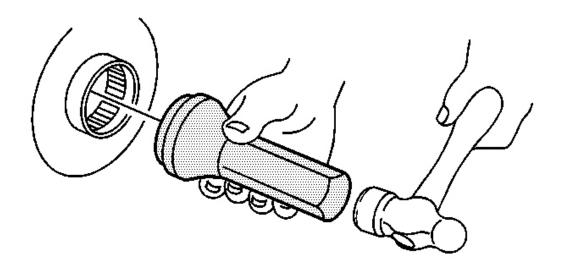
Driving J 21128 Or J 29713 Into The Bore Until The Axle Shaft Seal Bottoms Flush With The Tube Courtesy of GENERAL MOTORS CORP.
